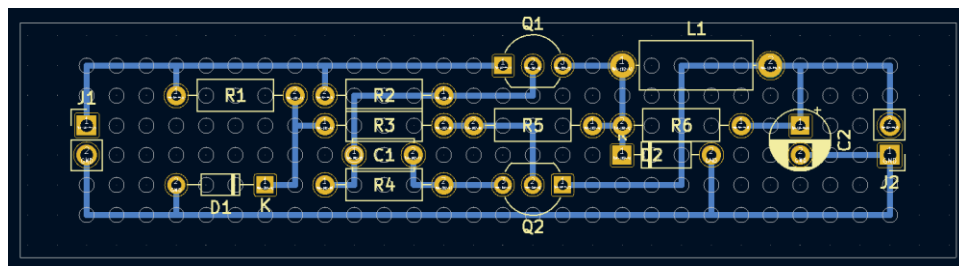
show an example of a perfboard prototype. The “traces” are pieces of wire which have been soldered directly to the underside board:
